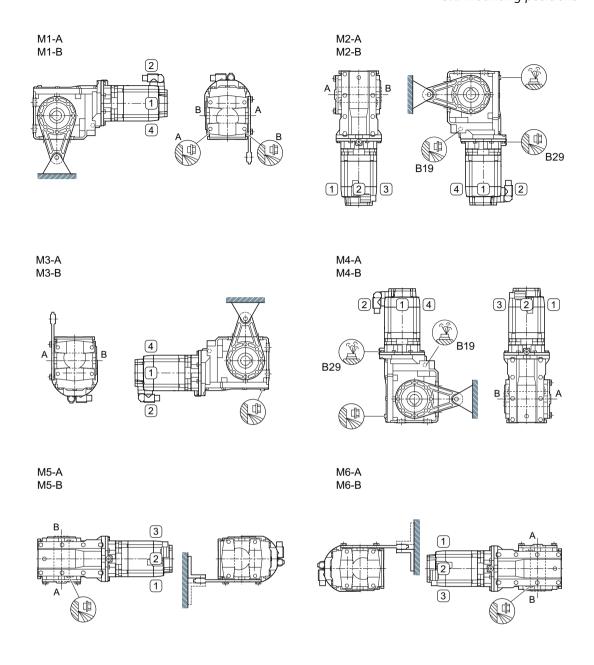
Mounting positions for servo bevel geared motors BAD, shaft-mounted design, frame sizes 19 - 29, 2 stage
